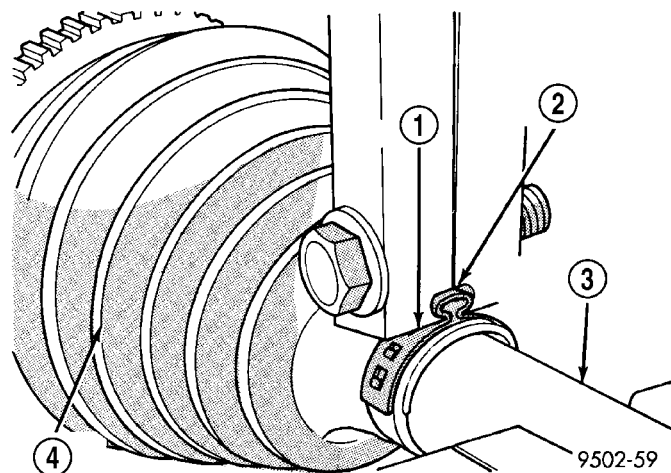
Sealing Boot Retaining Clamp Installed - Typical
